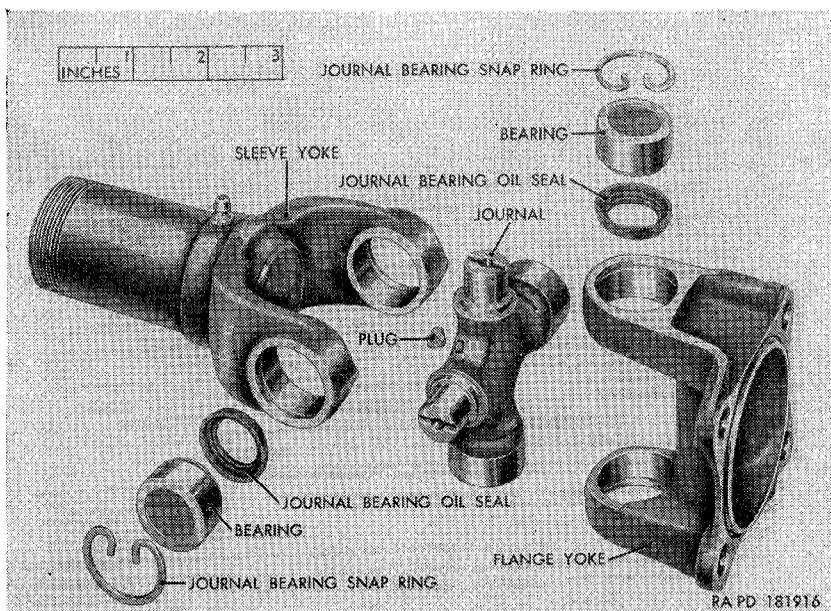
Rear propeller shaft front universal joint and rear propeller shaft-to-transfer flange yoke—partially exploded view.
